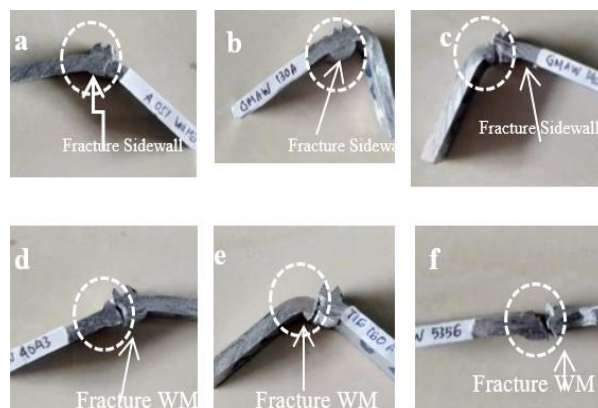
Fracture of the impact specimen of A6061-T6. (a) GMAW 120 A, (b) GMAW 140 A, (c) GMAW 140 A, (d) GTAW ER4043, (e) GTAW ER4047, and (f) GTAW ER5356
